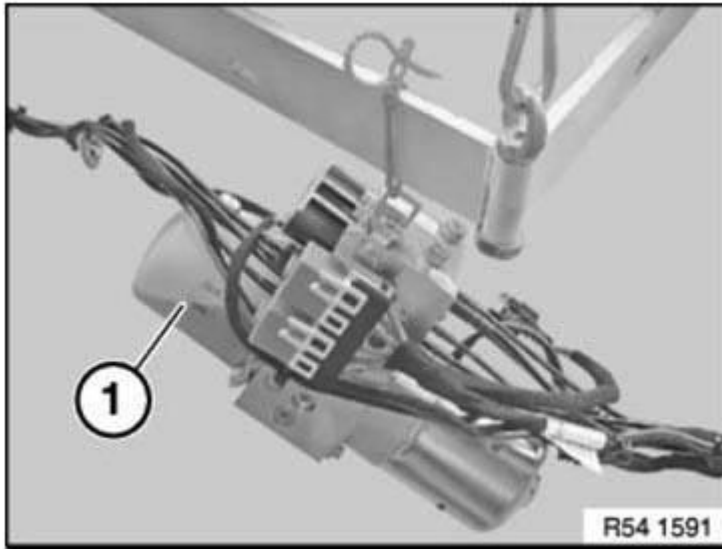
Identifying Hydraulic Control Unit With Cable Ties
